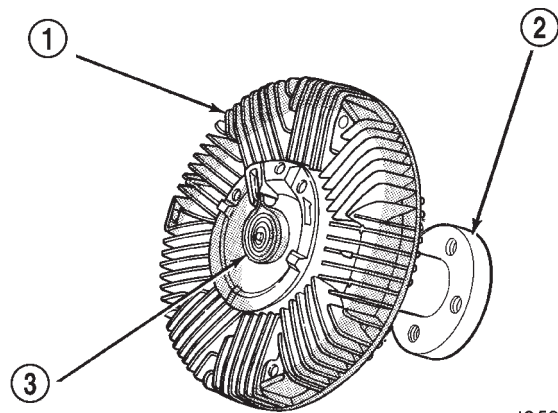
Water Pump Mounted Fan Drive - 4.0L Engine
